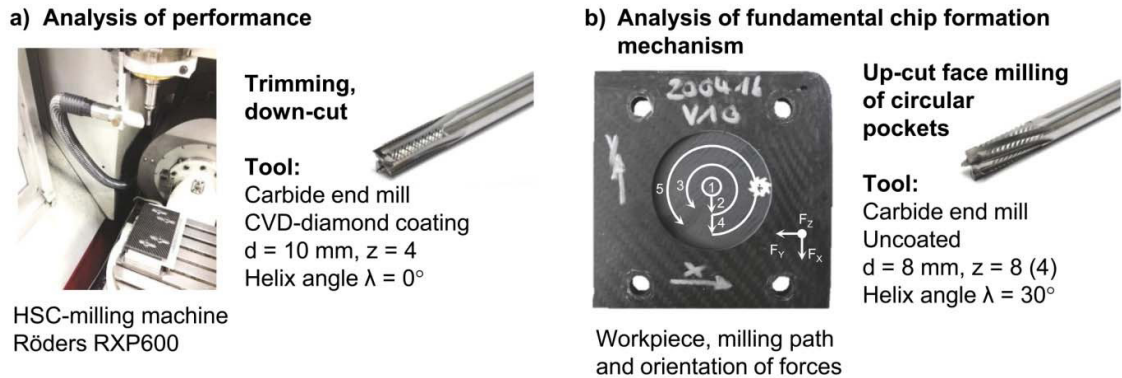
Setup - Machine tool with external dust extraction system and force dynamometer, cutting tools as well as CFRP workpiece and milling path
